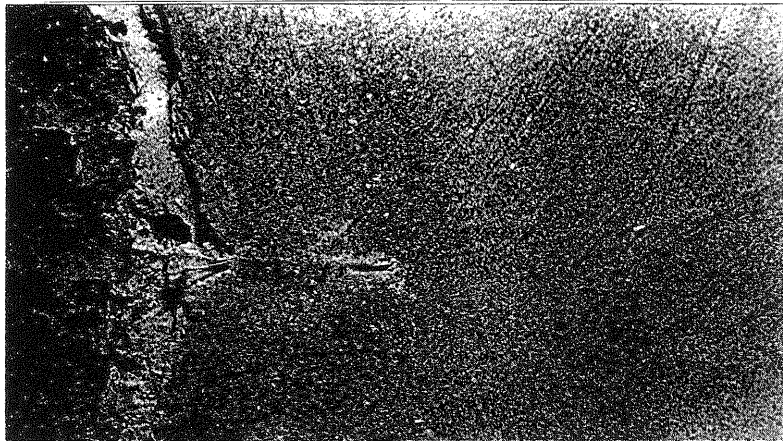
Photograph of part of a test specimen showing a 2.5 mm notch before crack initiation
